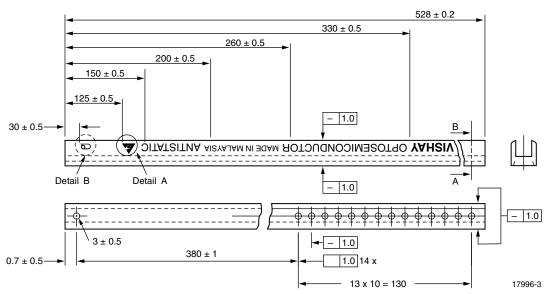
Shipping Tube Specifications for DIP-6 Packages
